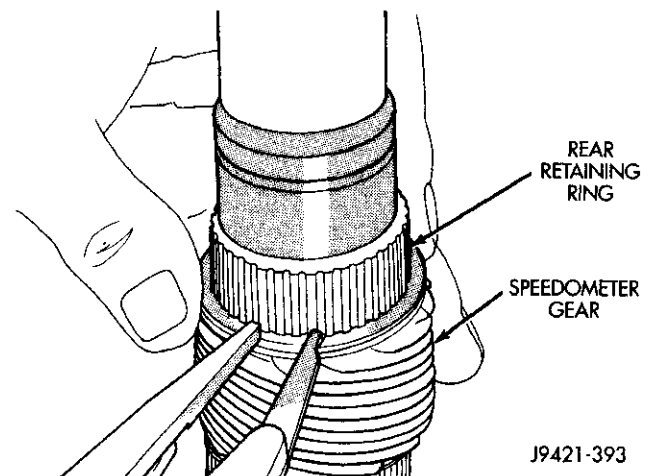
Speedometer Gear Rear Snap Ring Removal
